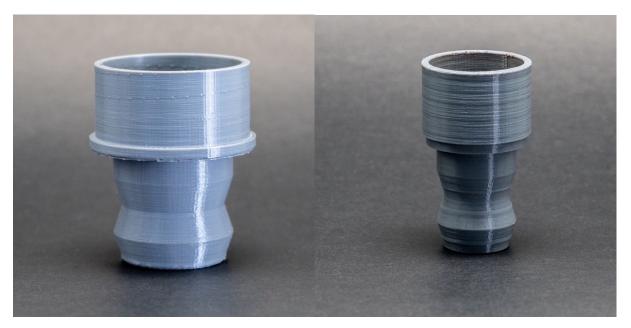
The 3D-printed bass clarinet mouthpiece adapter (left) and the Bb clarinet mouthpiece adapter (right).
